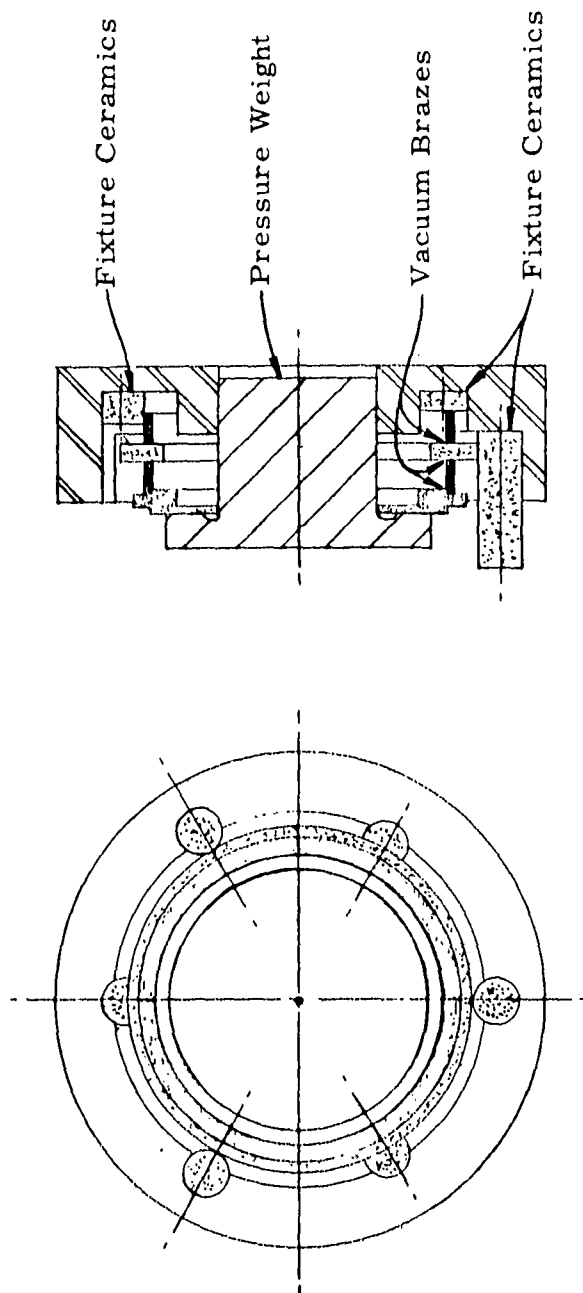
SEAL-ASSEMBLY FABRICATION FIXTURE
